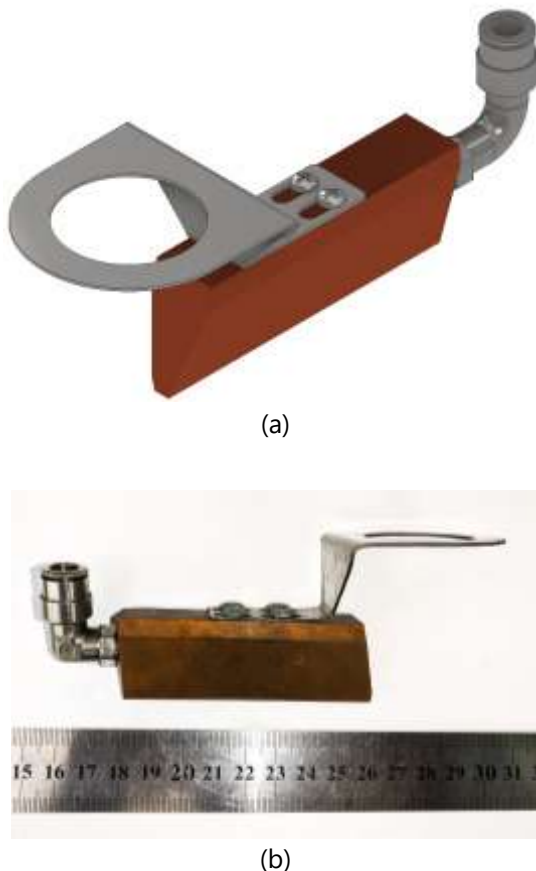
Gas protection system for the cooling part of the welded joint
